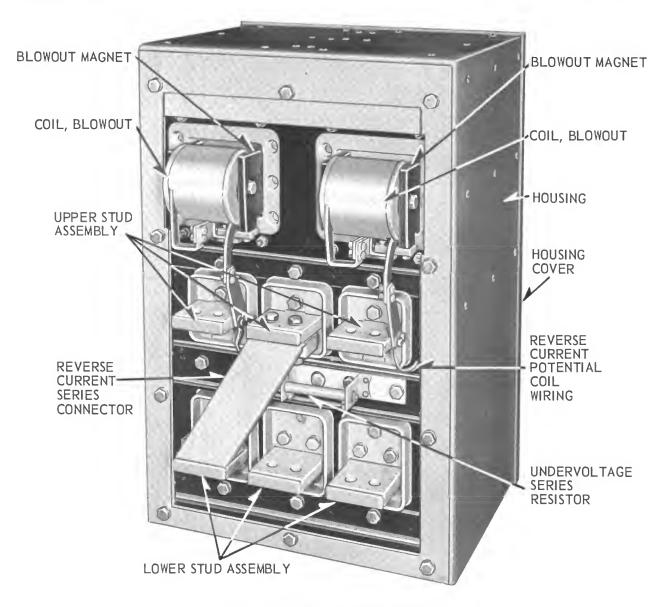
Rear View of Circuit Breaker (Photo 354995)
